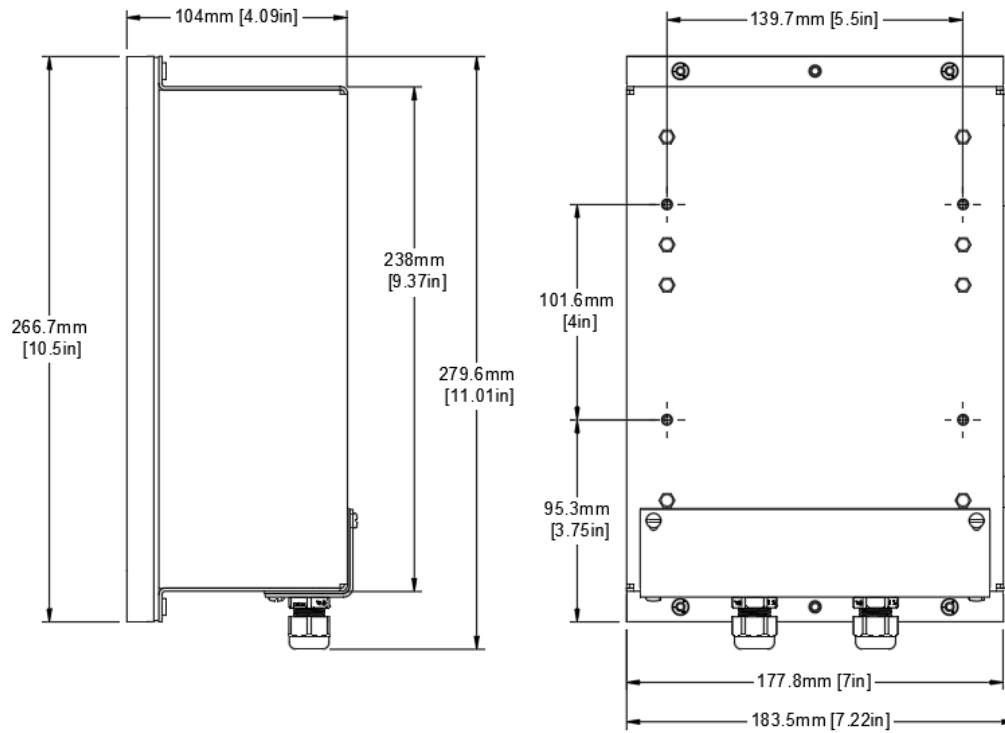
Dimensions of the transmitter unit. (All dimensions in inches)
